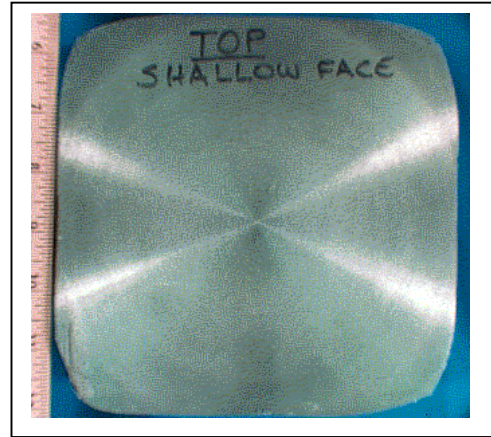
(d). Front surface of sample MMC-04 with no surface cracking observed.
